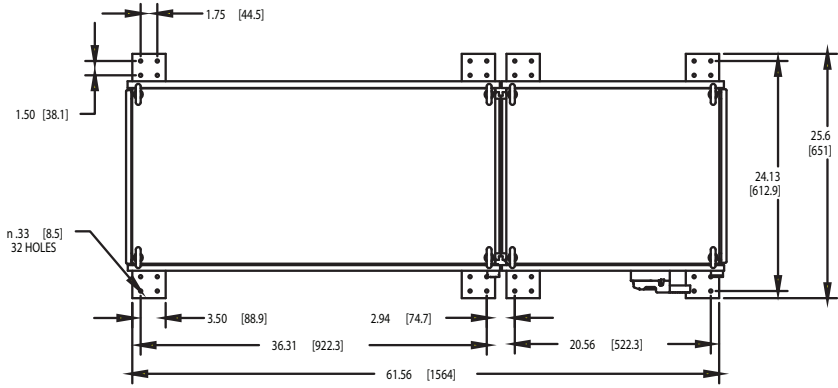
Enclosure for SMC Controllers—2000 mm x 1000 mm x 500 mm
